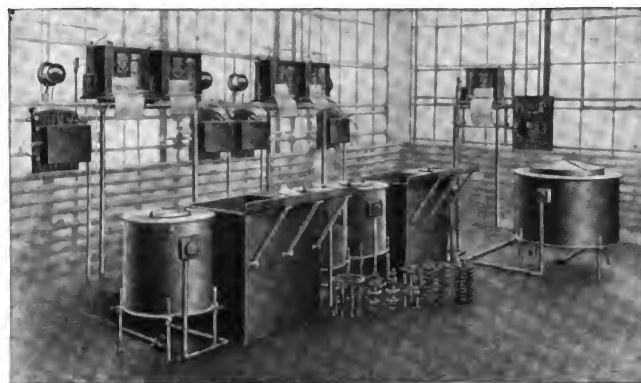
Electric furnaces and recording instruments heat treating automobile gears at Dort Motor Car Co., Flint, Mich.
